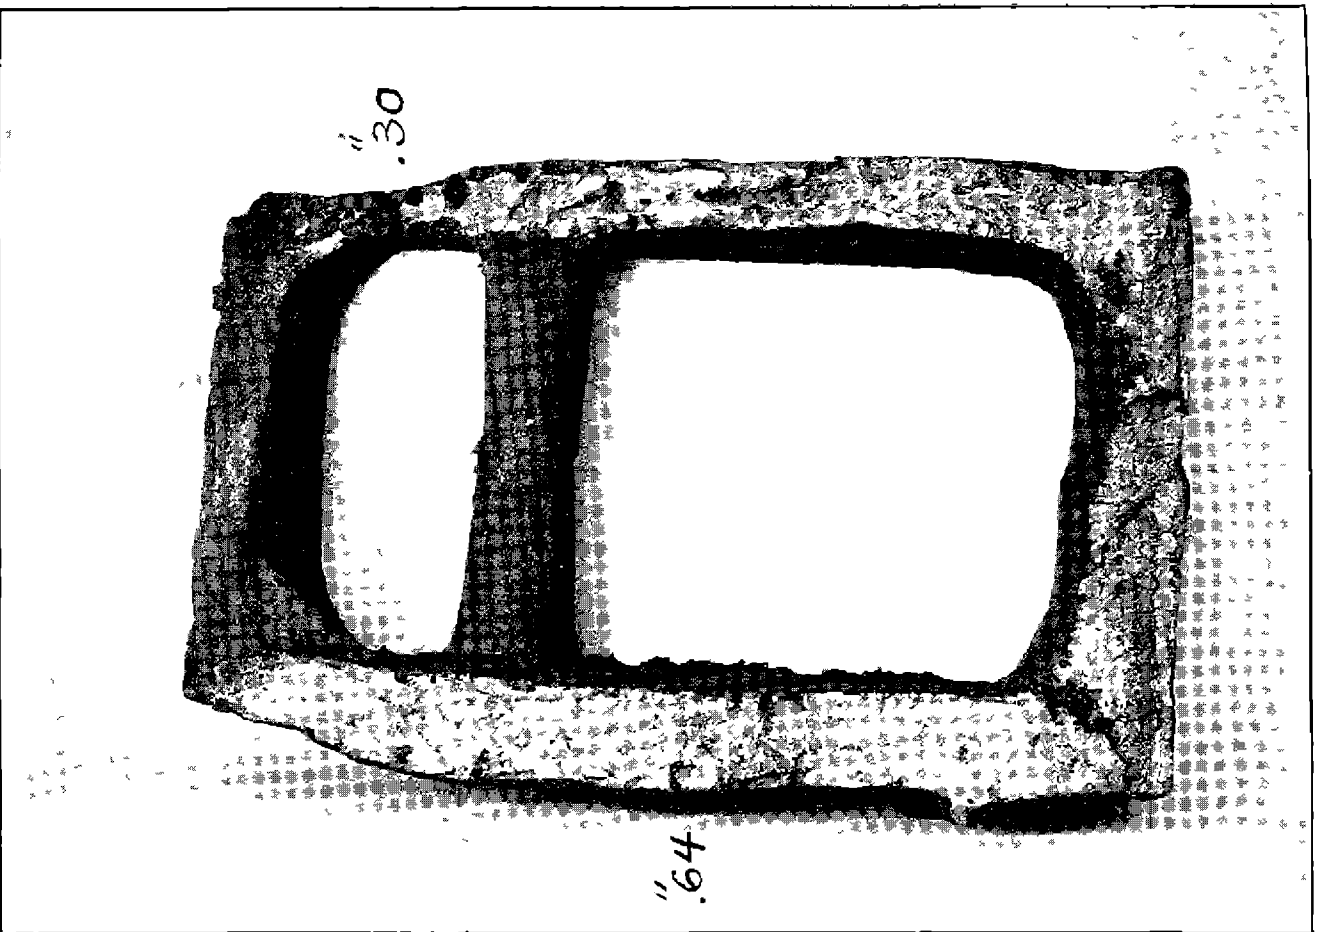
Photograph of fractured surface of Vulcan truck frame. Fracture made with steam hammer. end opposite fracture which
